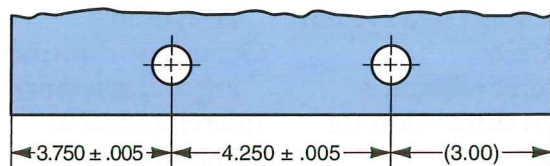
A reference dimension is indicated on a drawing by enclosing the dimension in parentheses. Reference dimensions are not toleranced. They are presented on the drawing for the benefit of engineering and manufacturing personnel. Reference dimensions are not used in the manufacture or inspection of the part.
